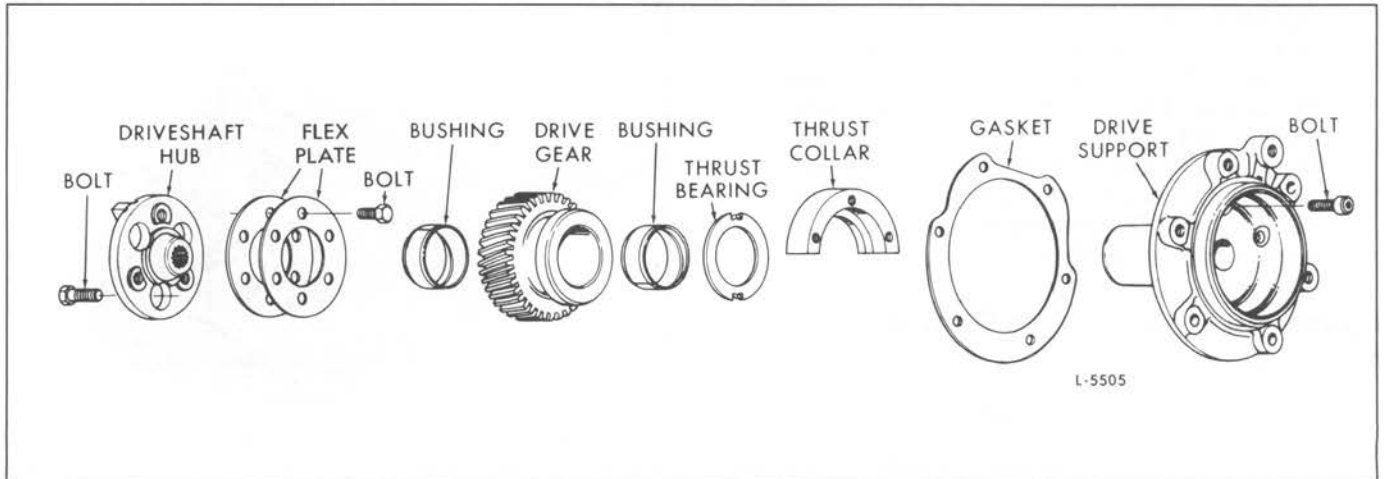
Rear Hub, Blower Drive Gear, Support Assembly and Relative Location of Parts
